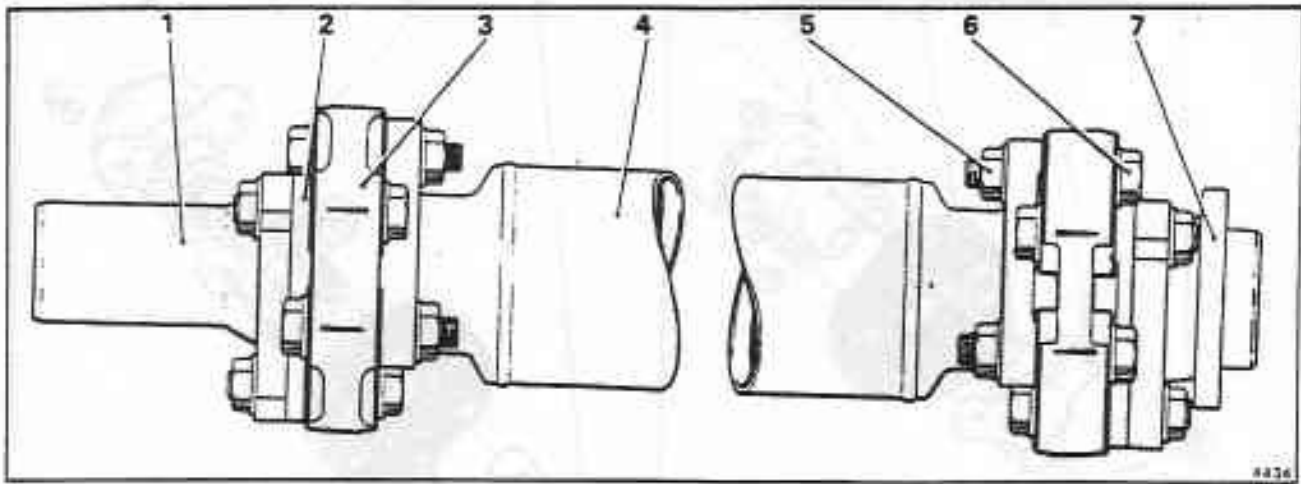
Propeller shaft/rubber flexible coupling to gearbox and final drive
